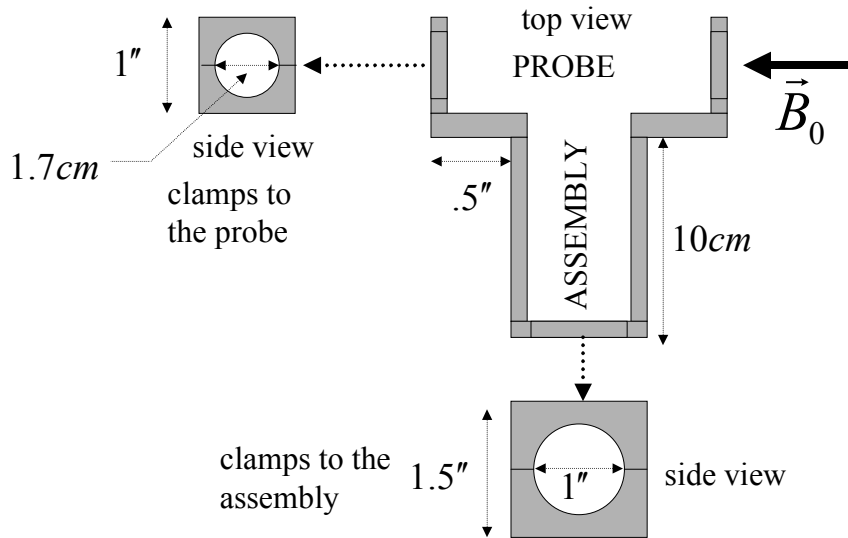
A schematic drawing of the aluminum brace that connects the housing to the assembly
